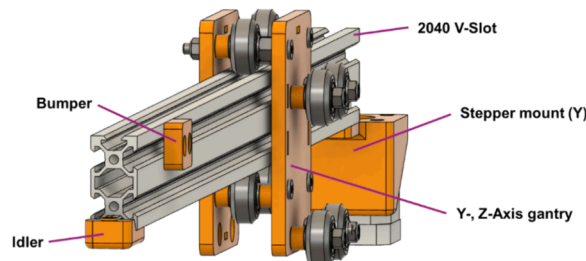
CAD model of the assembled Y-axis. Note that several parts were omitted, including screws, pulleys and belts.
